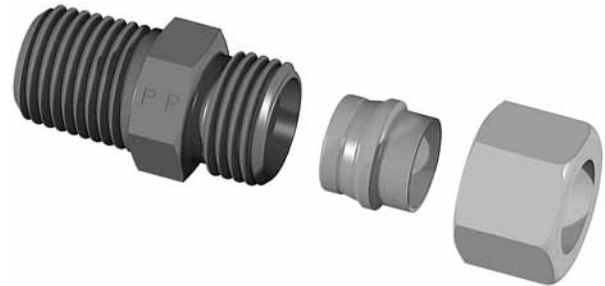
Intru-Lok Components: Body, Ferrule and Nut
